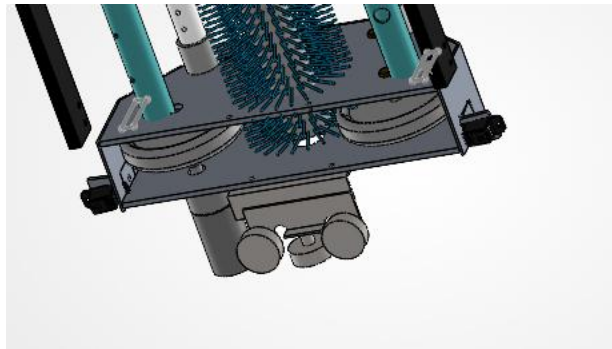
Clamping wheel arrangement used for panel attachment (own design)
